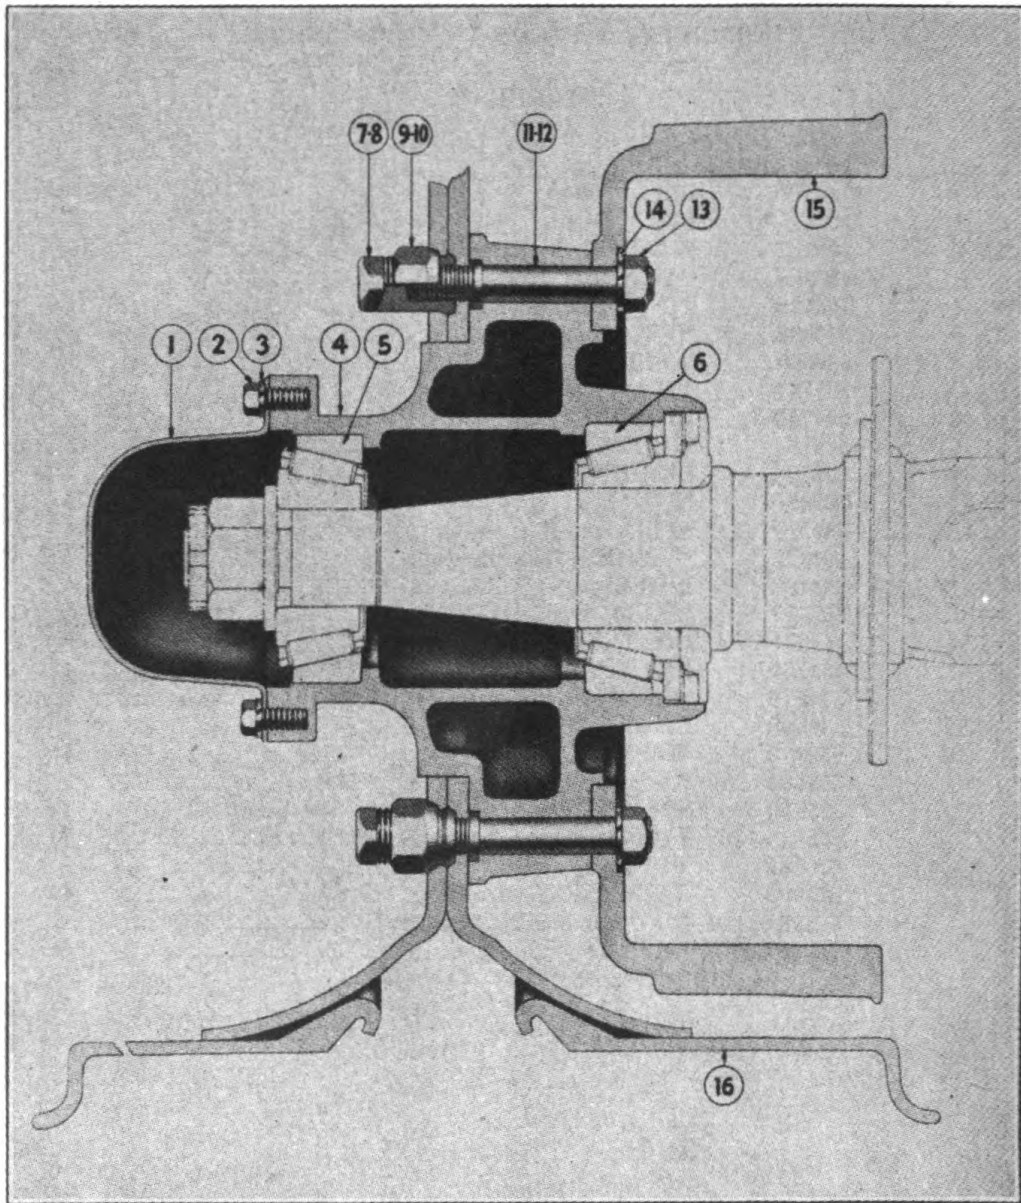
WHEELS, HUBS AND DRUMS—FRONT
